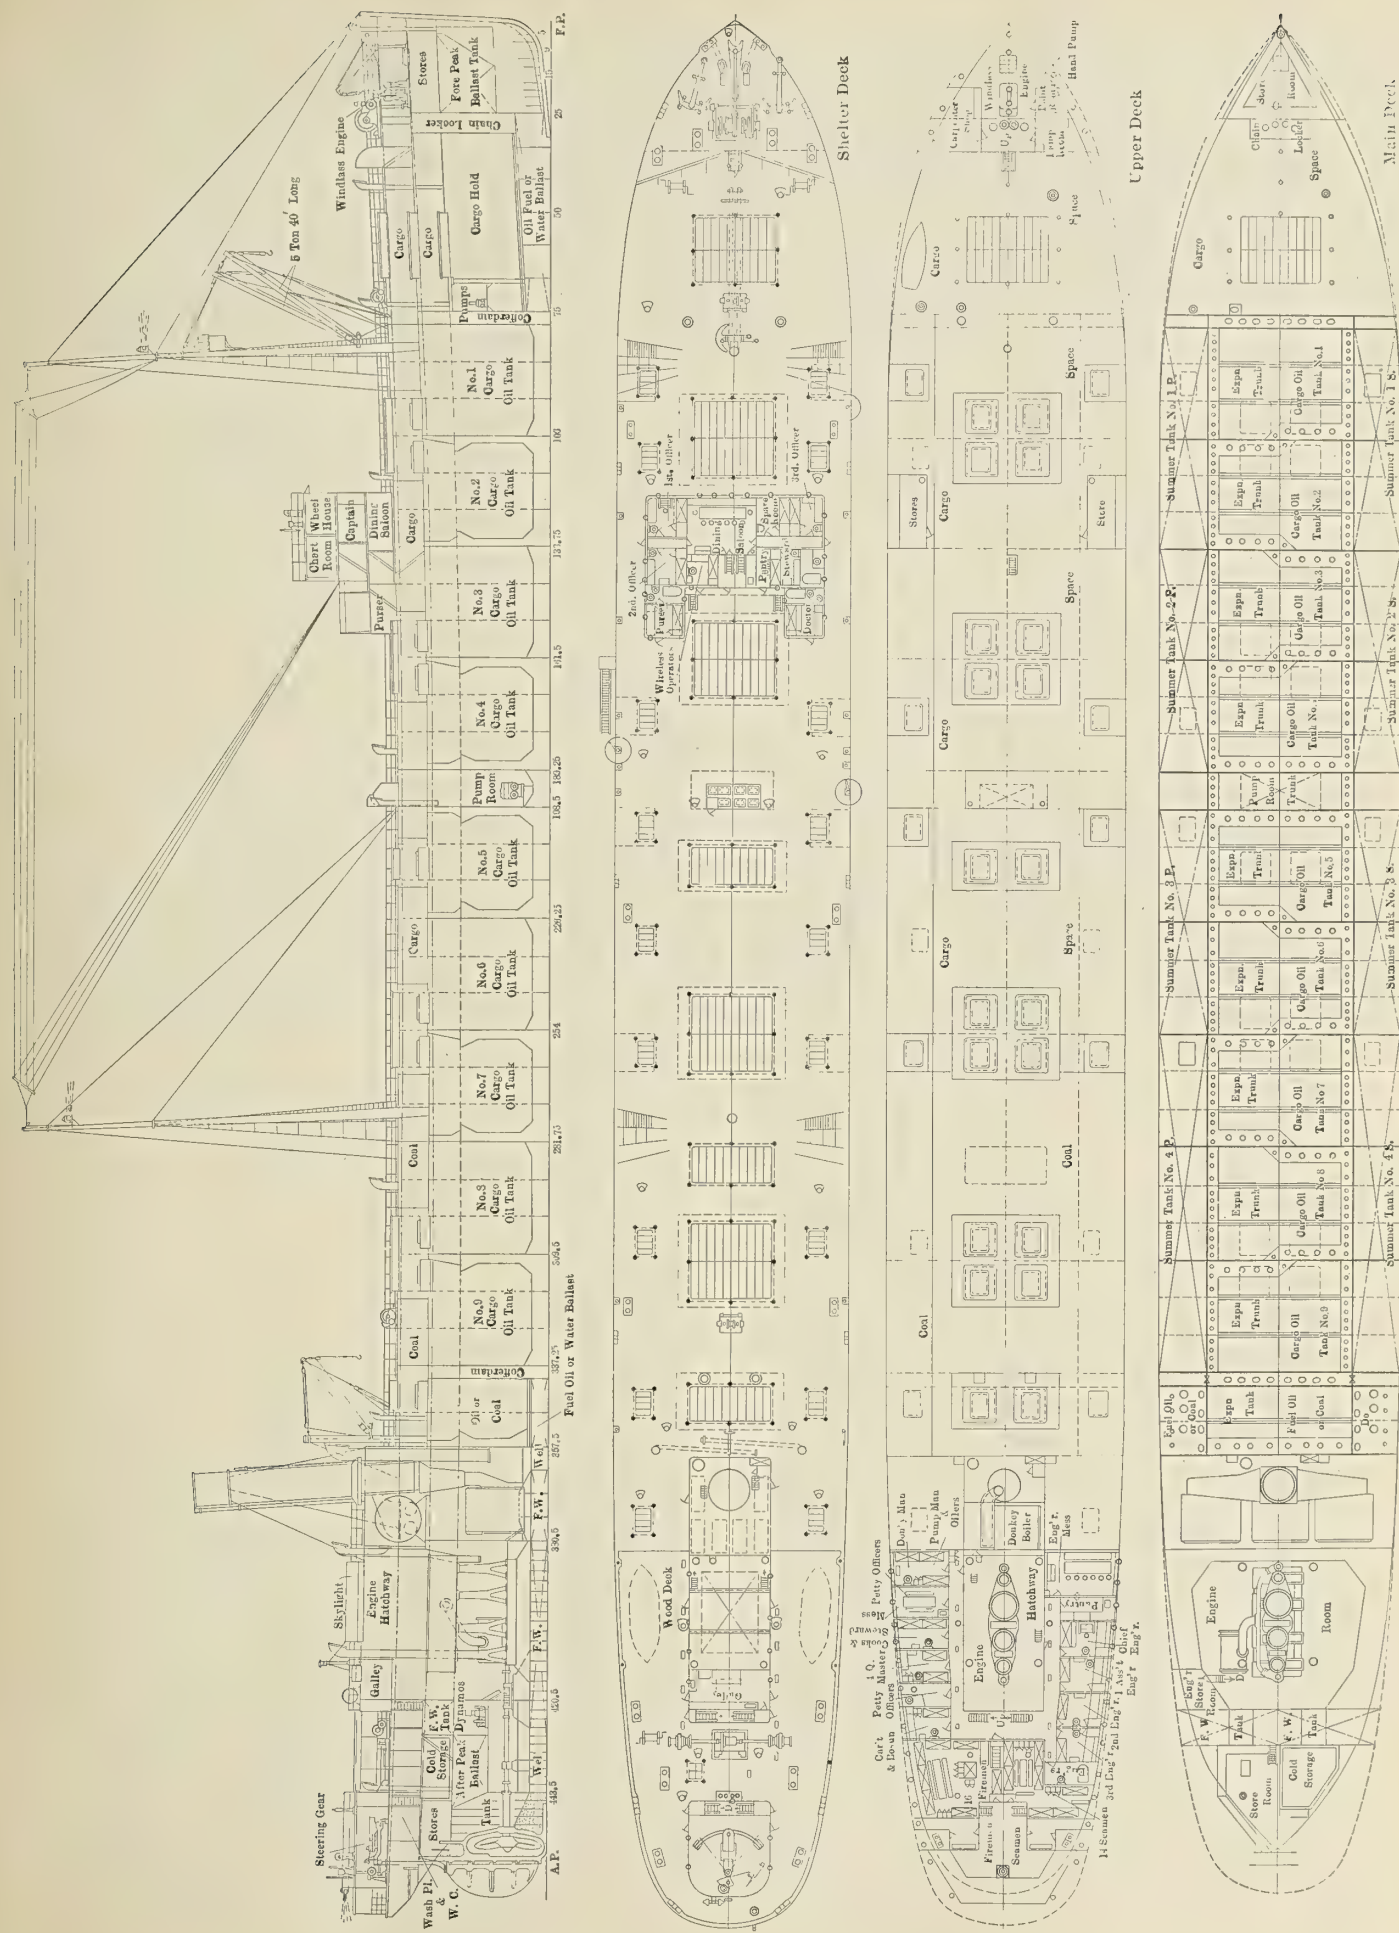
Profile and Deck Plans of the Oil Tank Steamer *John D. Archbold
